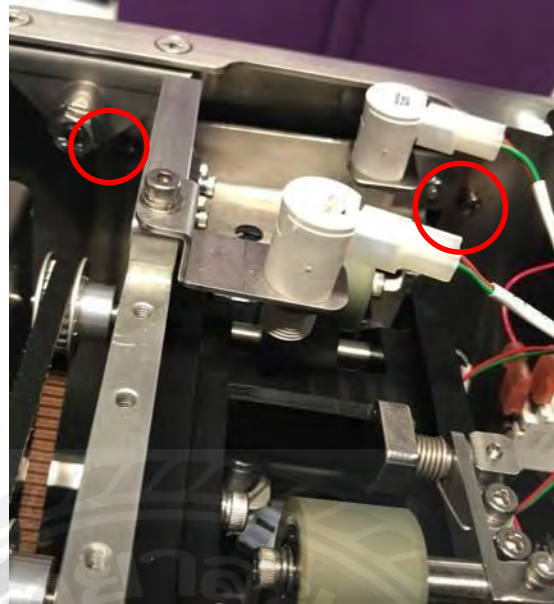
Location of Screws for the Bezel to be Installed Onto the AG
